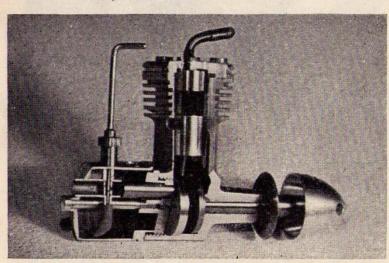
A. The little I c.c. "E.D. Bee" is here seen in section. Note compact design, and the disc inlet port with induction pipe, needle valve and fuel tank located at the rear of the crankcase.
